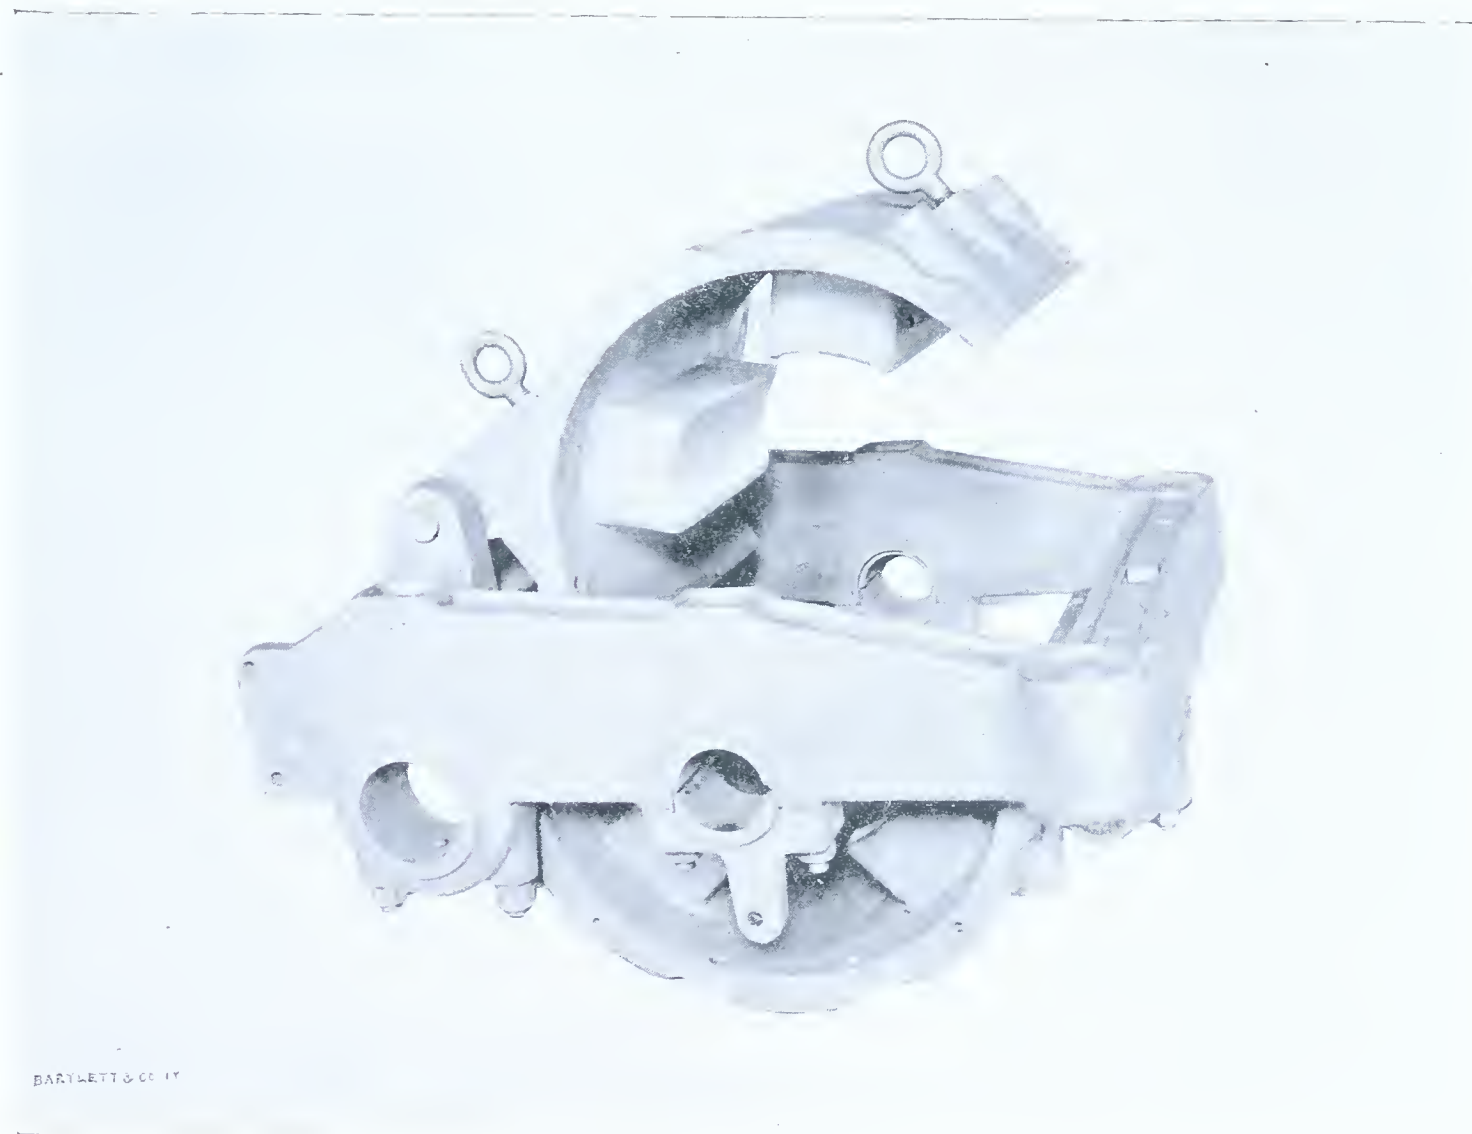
SINGLE REDUCTION RAILWAY MOTOR CASTINGS.
